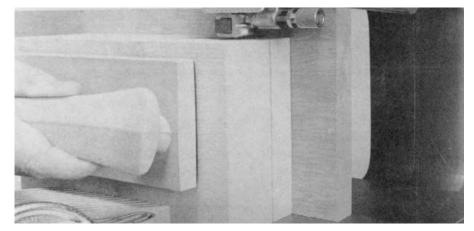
Use a high miter gauge extension when resawing. Feed the workpiece very slowly, especially if you are using a blade that is less than 1/2" wide. Narrower blades can be used, but they are more likely to "bow" in the cut.
